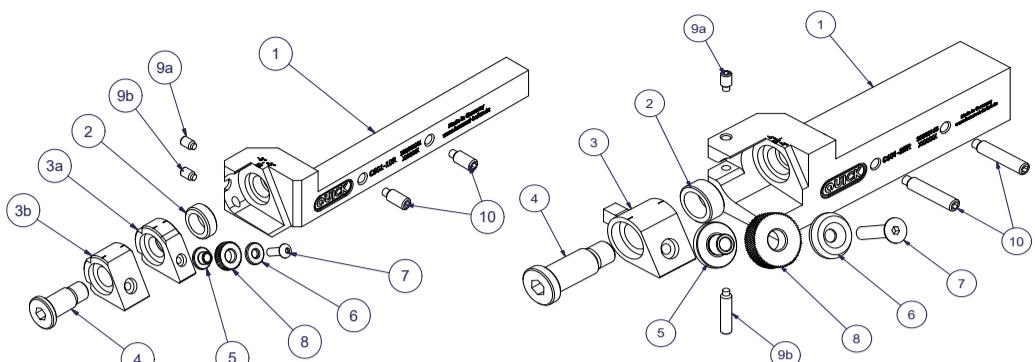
Series C601-12R exploded drawing (swiss-type lathe)
